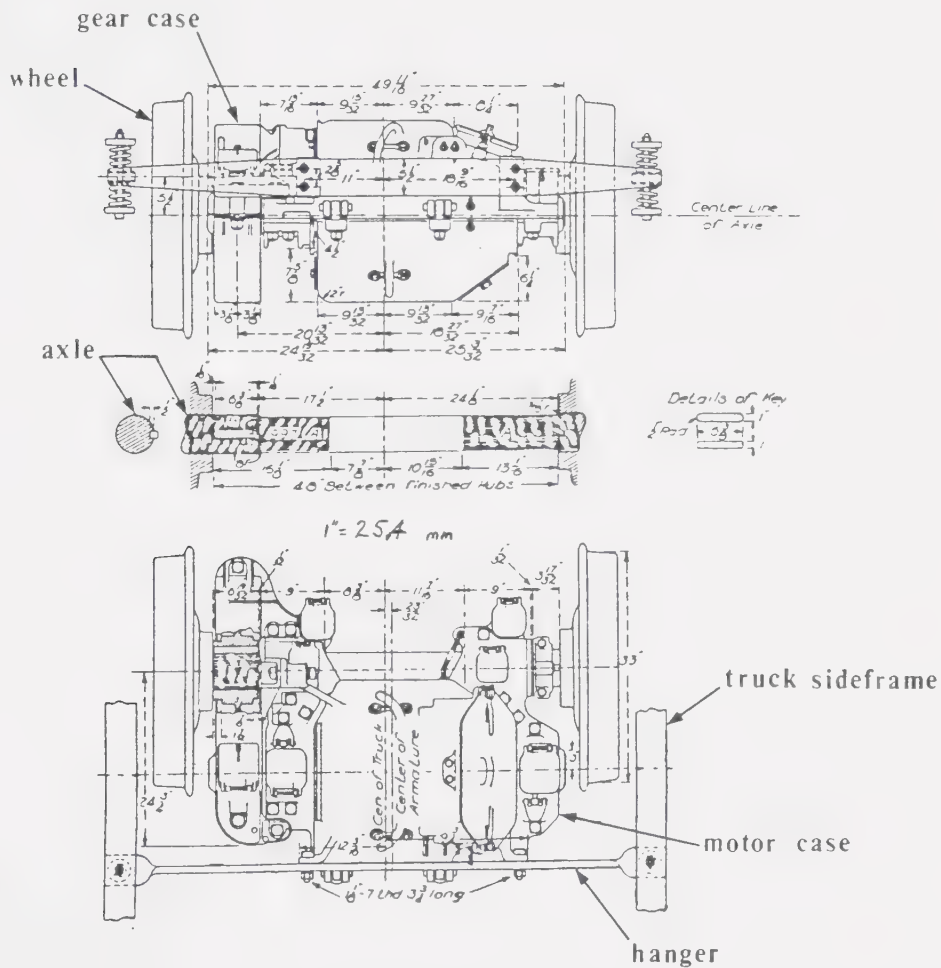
OUTSIDE HUNG GE-80A MOTOR, END AND PLAN VIEWS
